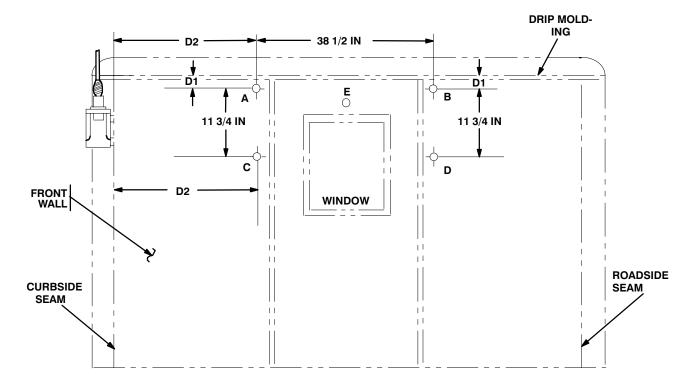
(2). Typical Radio Shelf Installation - M109 Series: Drilling Pattern (Outside)
